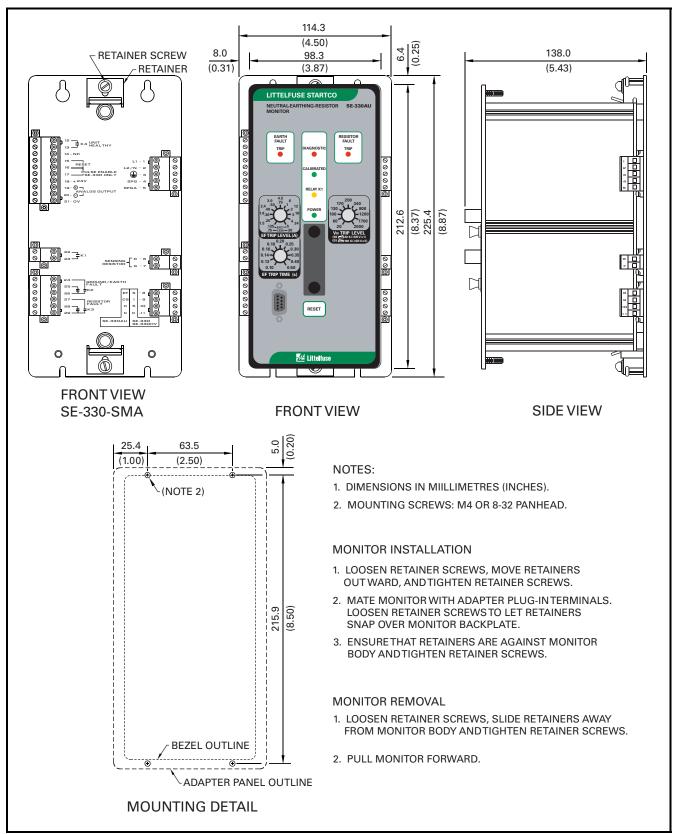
SE-330AU Outline and Surface-Mounting Details.
